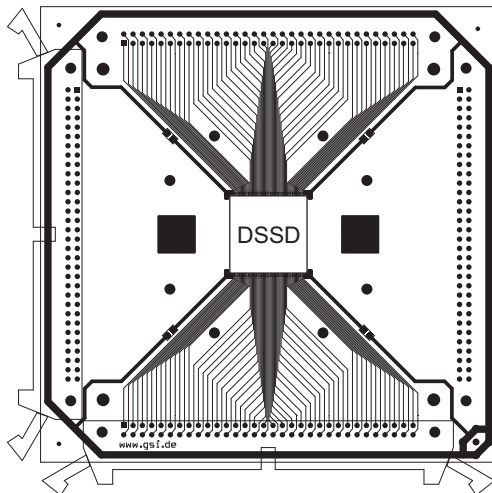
PCB layout for 64x64 and 64x16 DSSDs.
